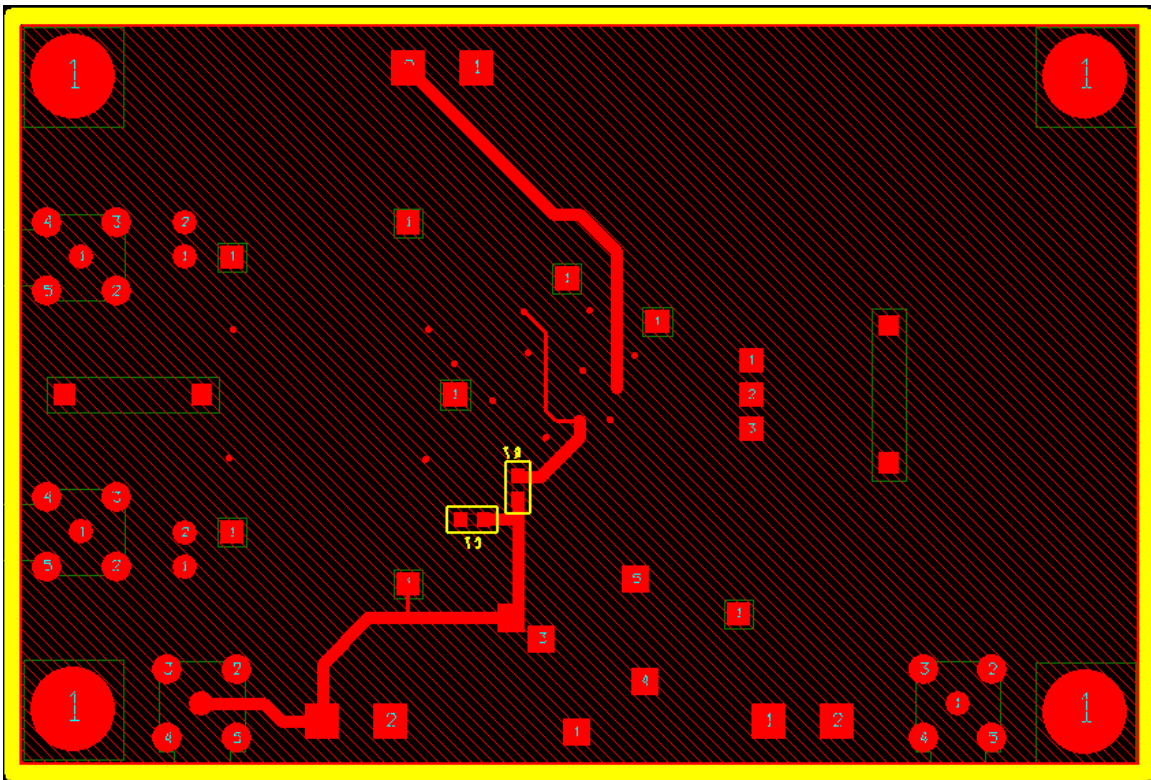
NCP2811AFCT1GEVB Board Layout (Bottom View)
